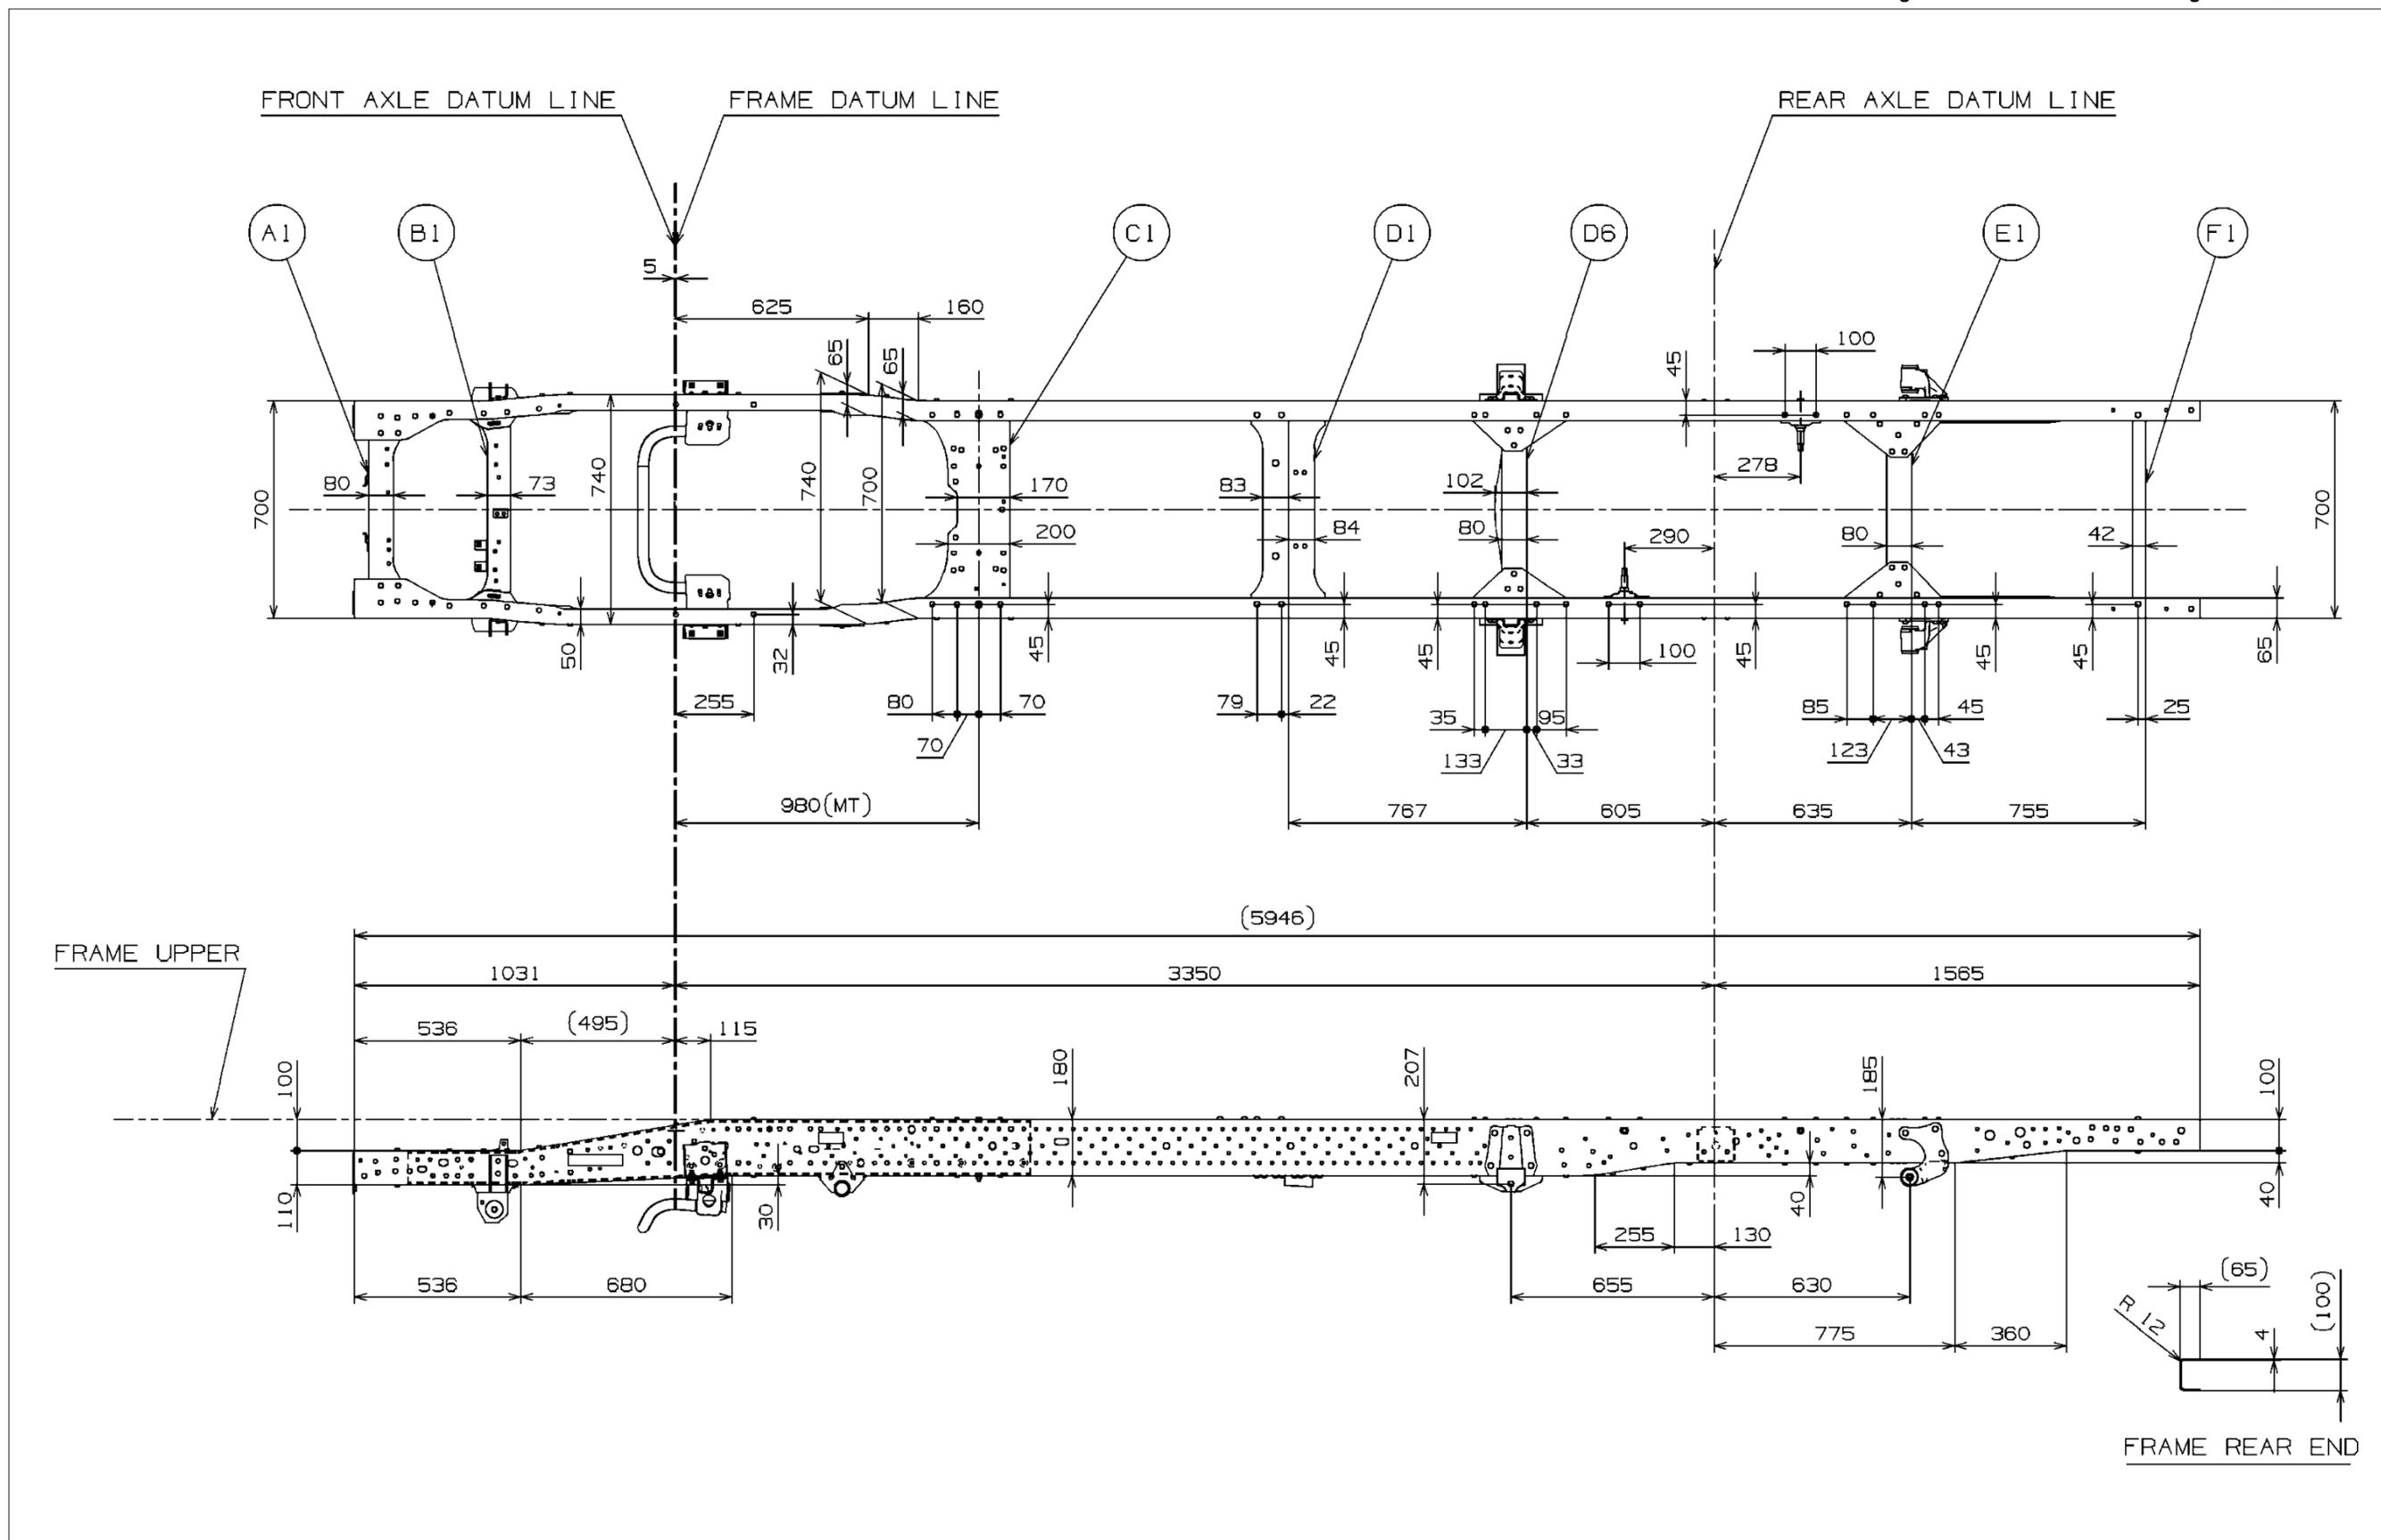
Chassis Frame Drawing NNR85L/U-FD5AYEN
